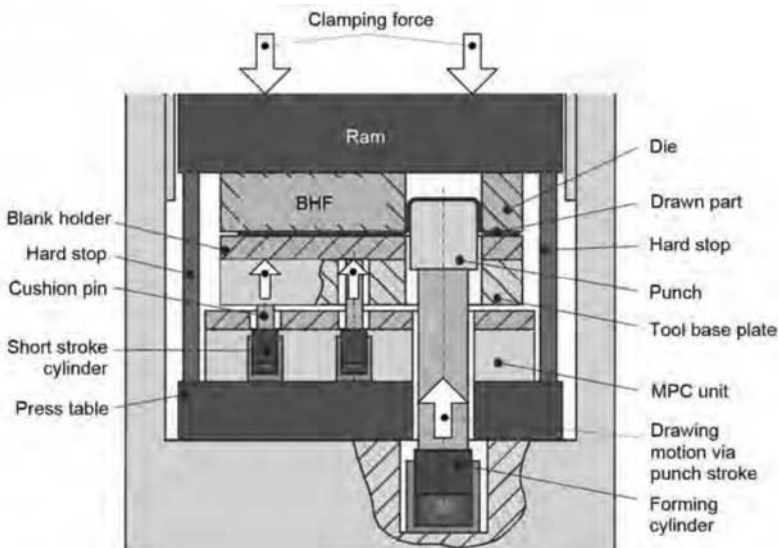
Deep drawing of stainless steel sinks with multipoint cushion (MPC) technology. BHF, blank holder force. Source: Ref 13.11
